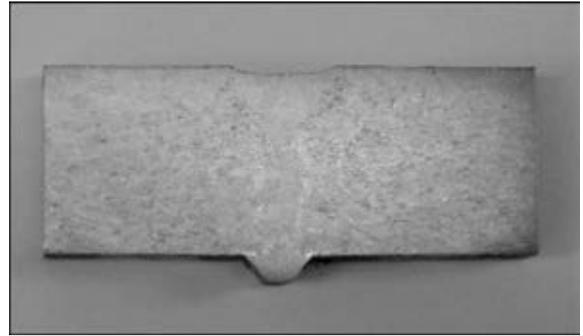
Macrosection of welded joint of alloy 1 made by EBW with 200 °C preheating and post-weld LHT
